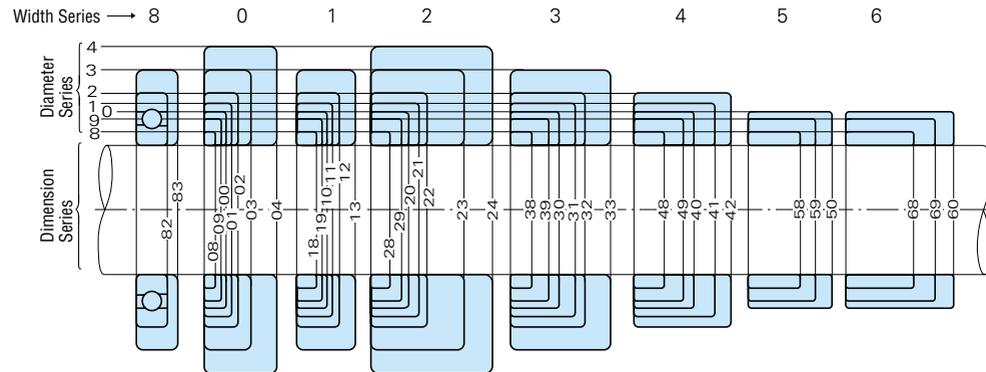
Comparison of Cross Sections of Radial Bearings (except Tapered Roller Bearings) for various Dimensional Series
